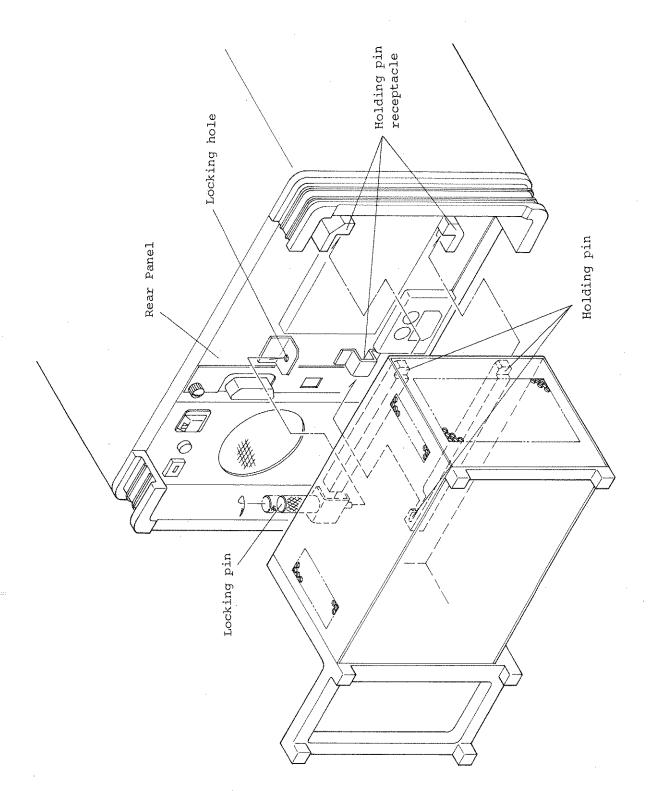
Mounting MZ146A DC-AC Inverter on MW910C
